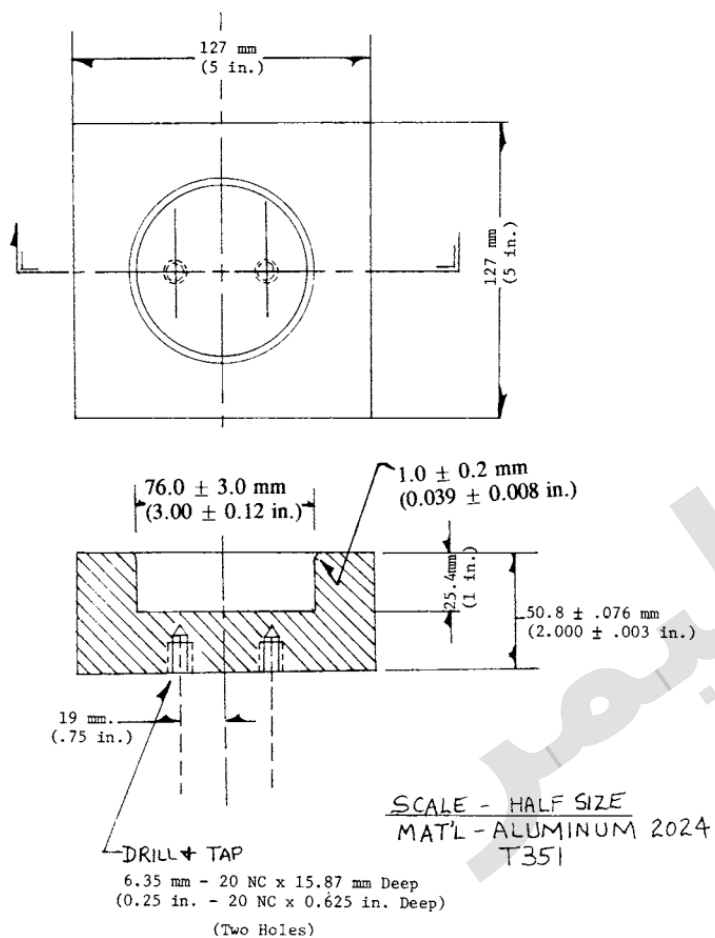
Specimen-Support Plate Used for Geometries GA and GD
